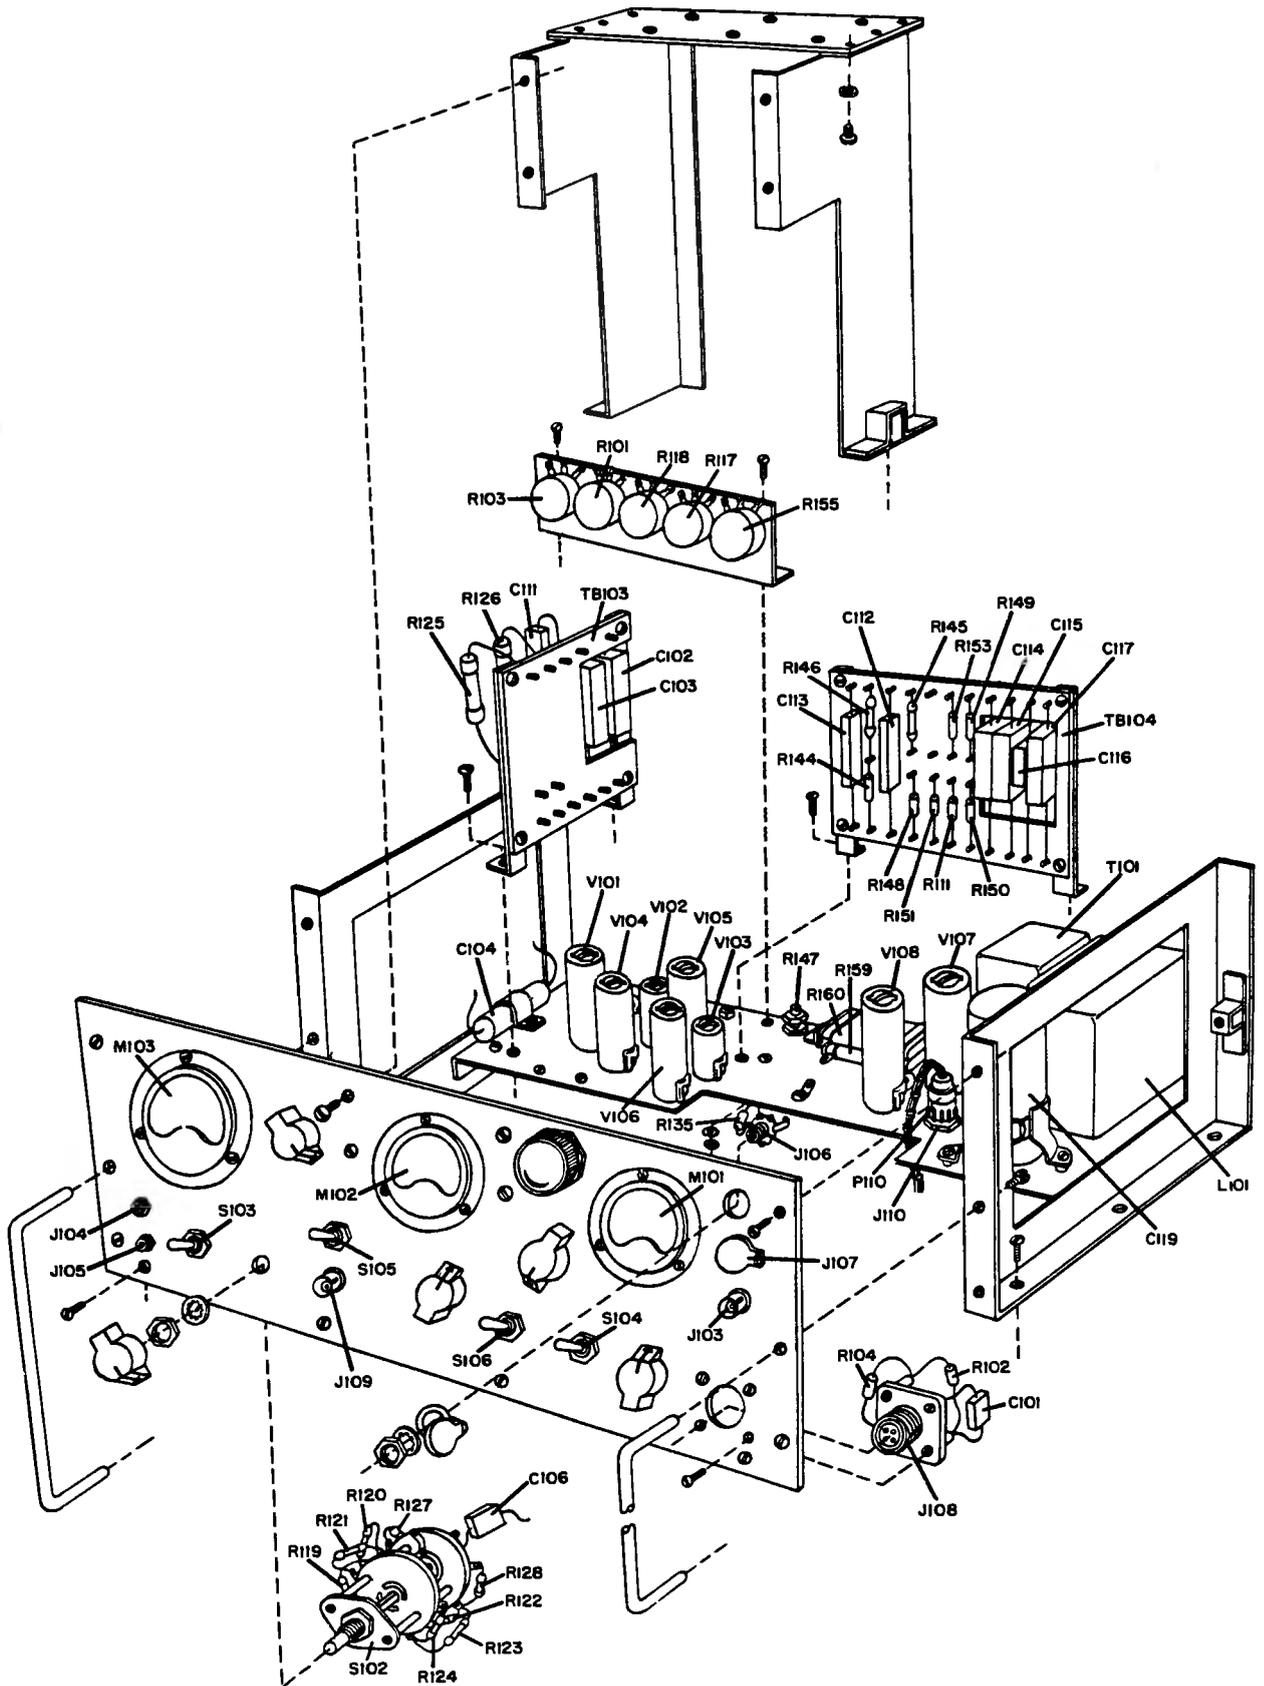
Test Set Subassembly TS-687/TRM-1, Exploded View
